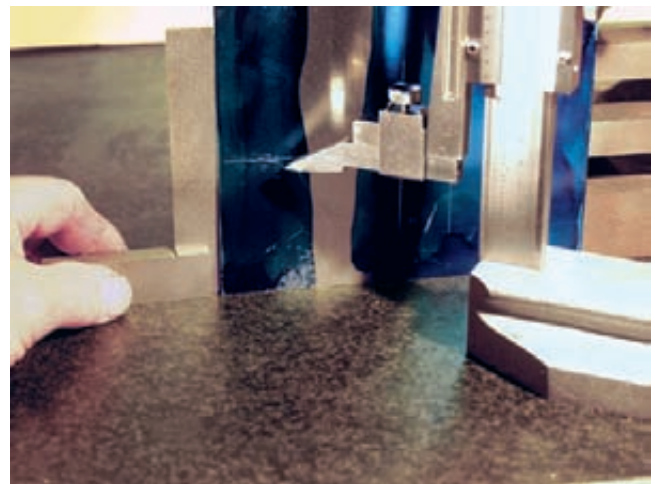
After the workpiece is turned 90 degrees, it can be checked with a square.
